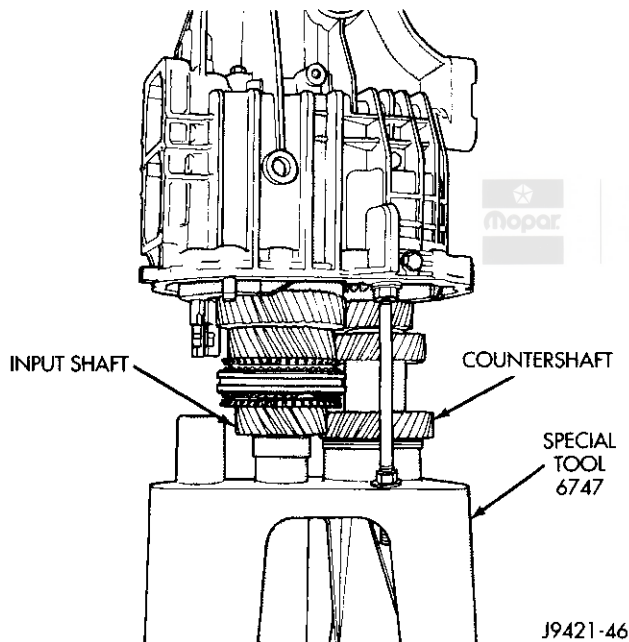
Geartrain And Housing Mounted On Fixture Tool
